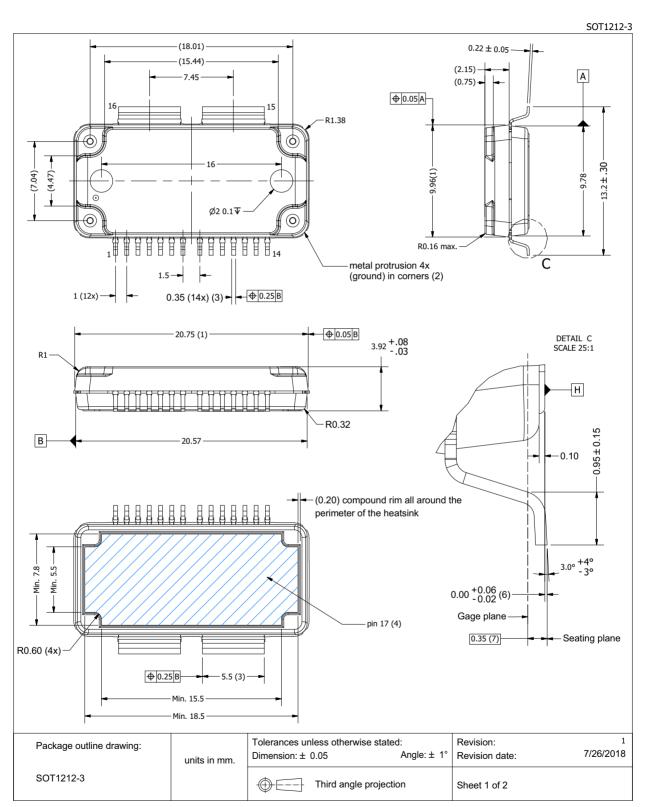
Package outline SOT1212-3 (sheet 1 of 2)
